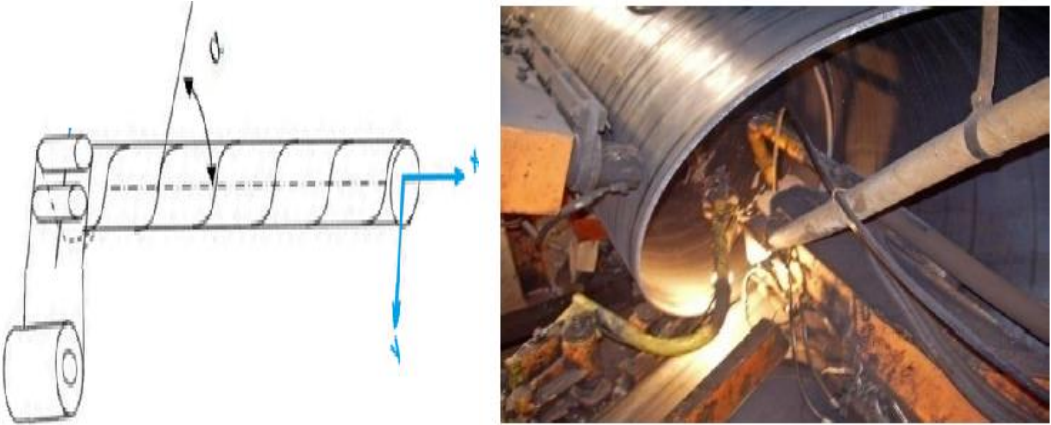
Process welded pipes inspiral form [6,7].
